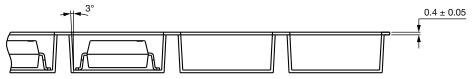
Tape and Reel Packaging (750 pieces on reel)
